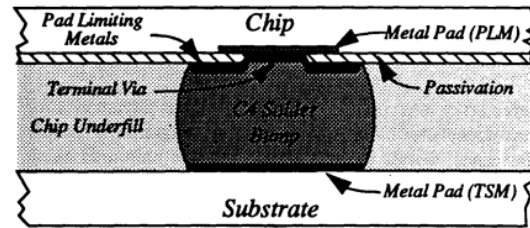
Schematic of the C4 solder bump with Sn95Pb solder [23].
